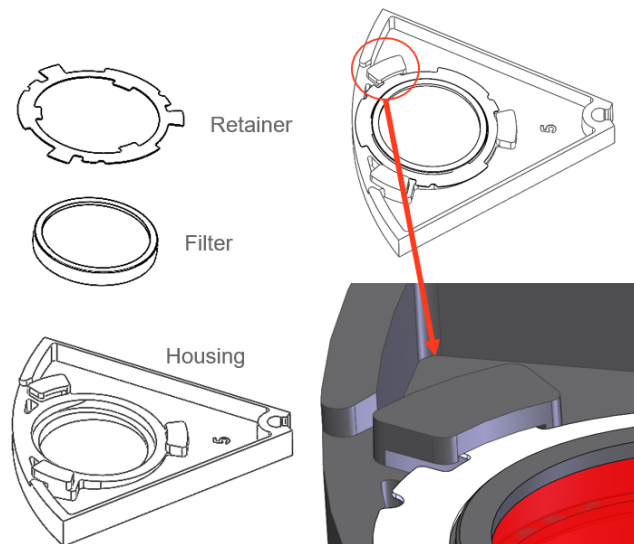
Filter mounting design that features an injection molded housing, an off-the-shelf ring mounted filter and a photoetched flat stainless steel retaining ring (Left). Detail view of the retainer tab retention feature on the molded plastic housing (Right). [Courtesy of Optikos Corporation]
